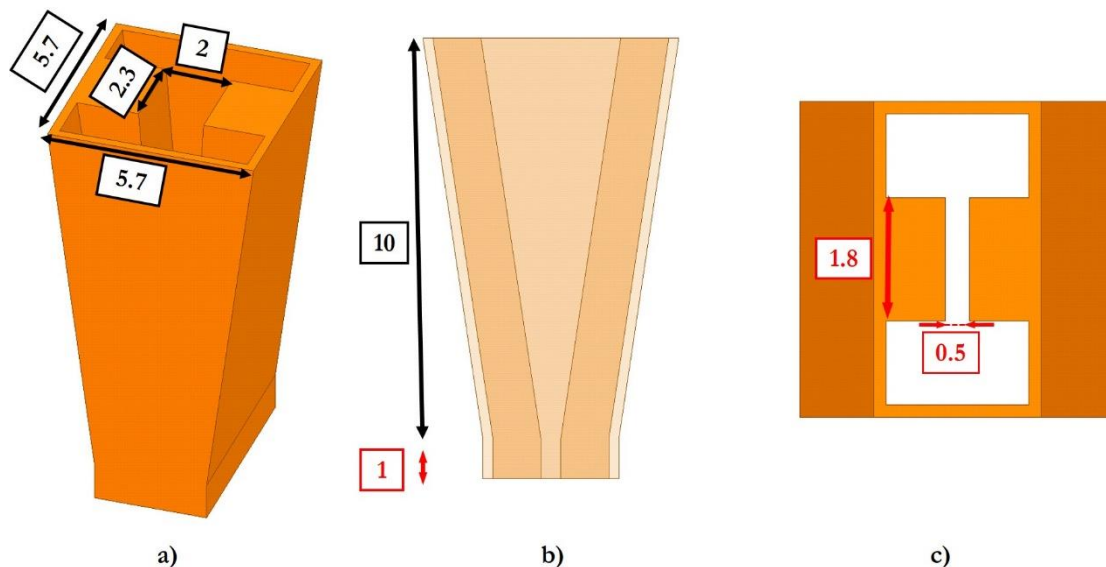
Designed horn-like DRWG with dimensions in mm: a) isometric view, b) transparent front view, c) bottom view.
